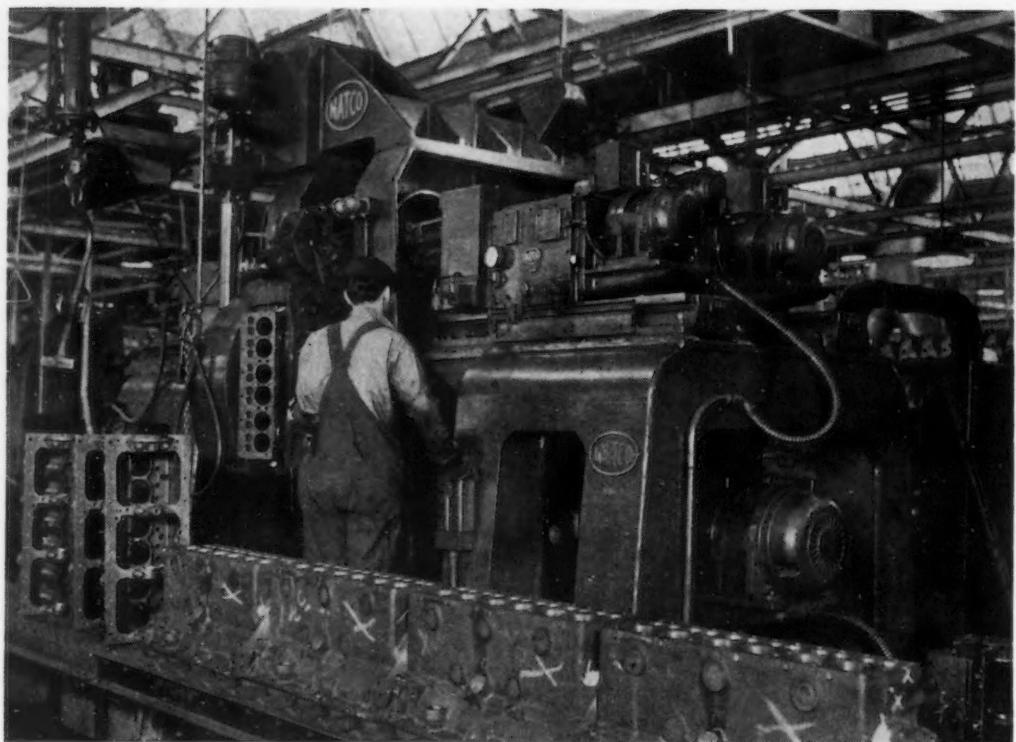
There are three work heads on each side of the large drum-type fixture in this machine for finishing the oil pump and distributor holes. The block is located on plugs engaging the semi-finished camshaft holes.
